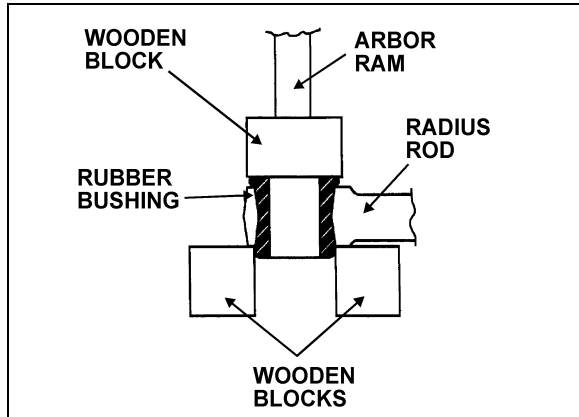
RADIUS ROD BUSHING INSTALLATION 16012
